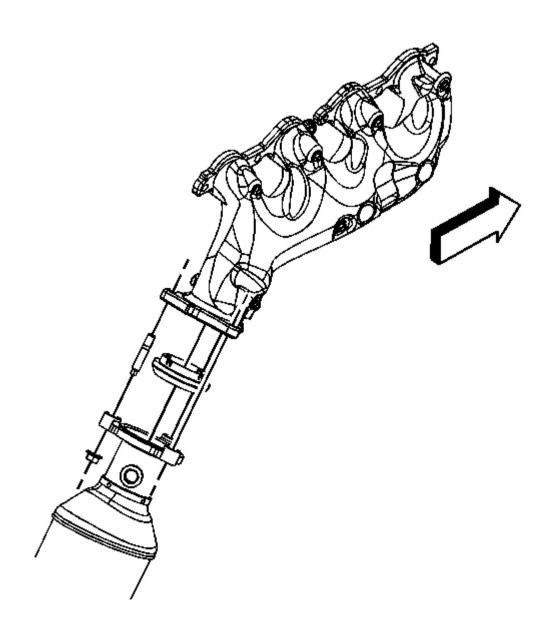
View Of Exhaust Manifold, Gasket & Catalytic Converter
